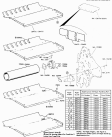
EXPLODED VIEW OF THE MECHANICAL ASSEMBLY
